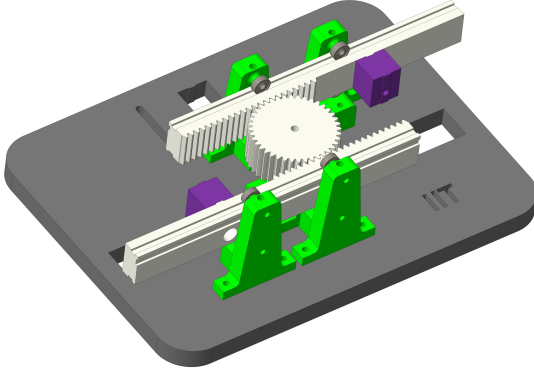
CAD model of the support base. The rack-and-pinion, the bearing blocks and the spacers are highlighted.
